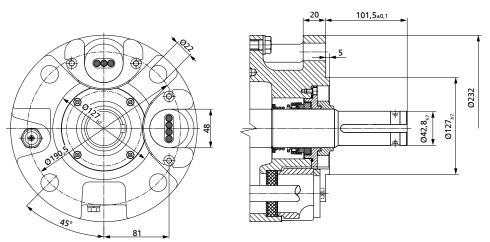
UMA 250, UMA-S 250 mating dimensions in [mm]
